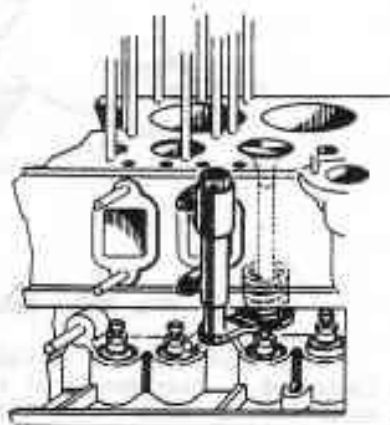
EXHAUST VALVE SPRING COMPRESSING TOOL.
